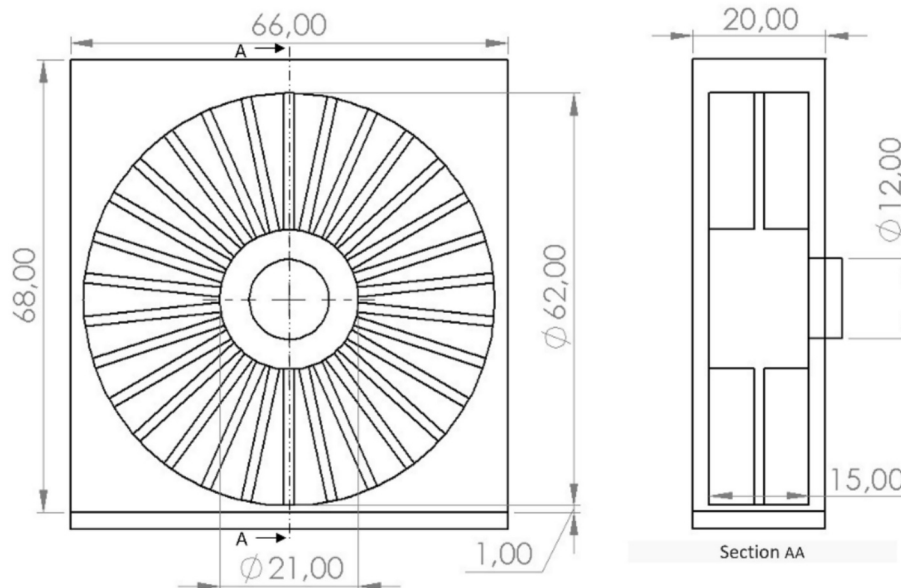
Dimensional drawing of the structured grinding wheel used in simulations.
